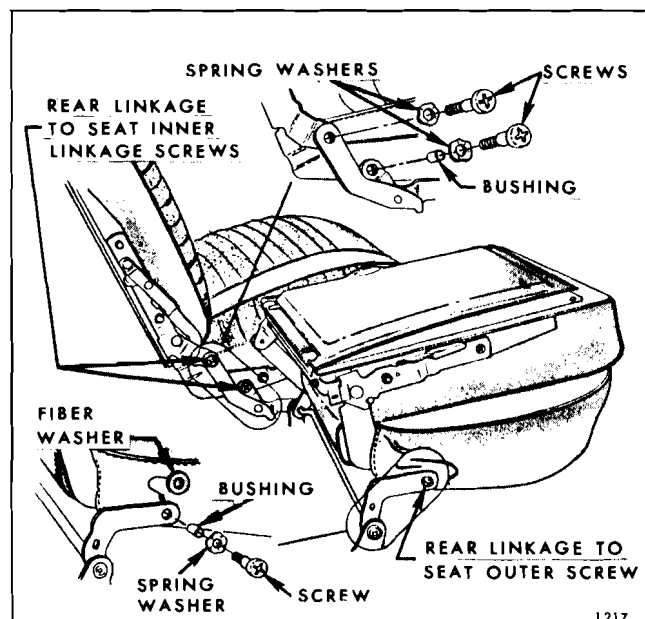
Floor Pan Rear Linkage (Vista Cruiser and Sport Wagon Styles)
